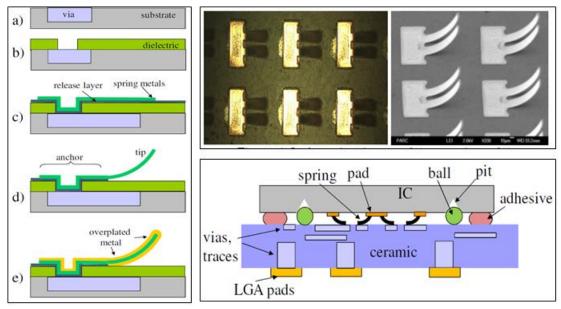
Au-MoCr-Au microspring fabrication and assembly [37].
